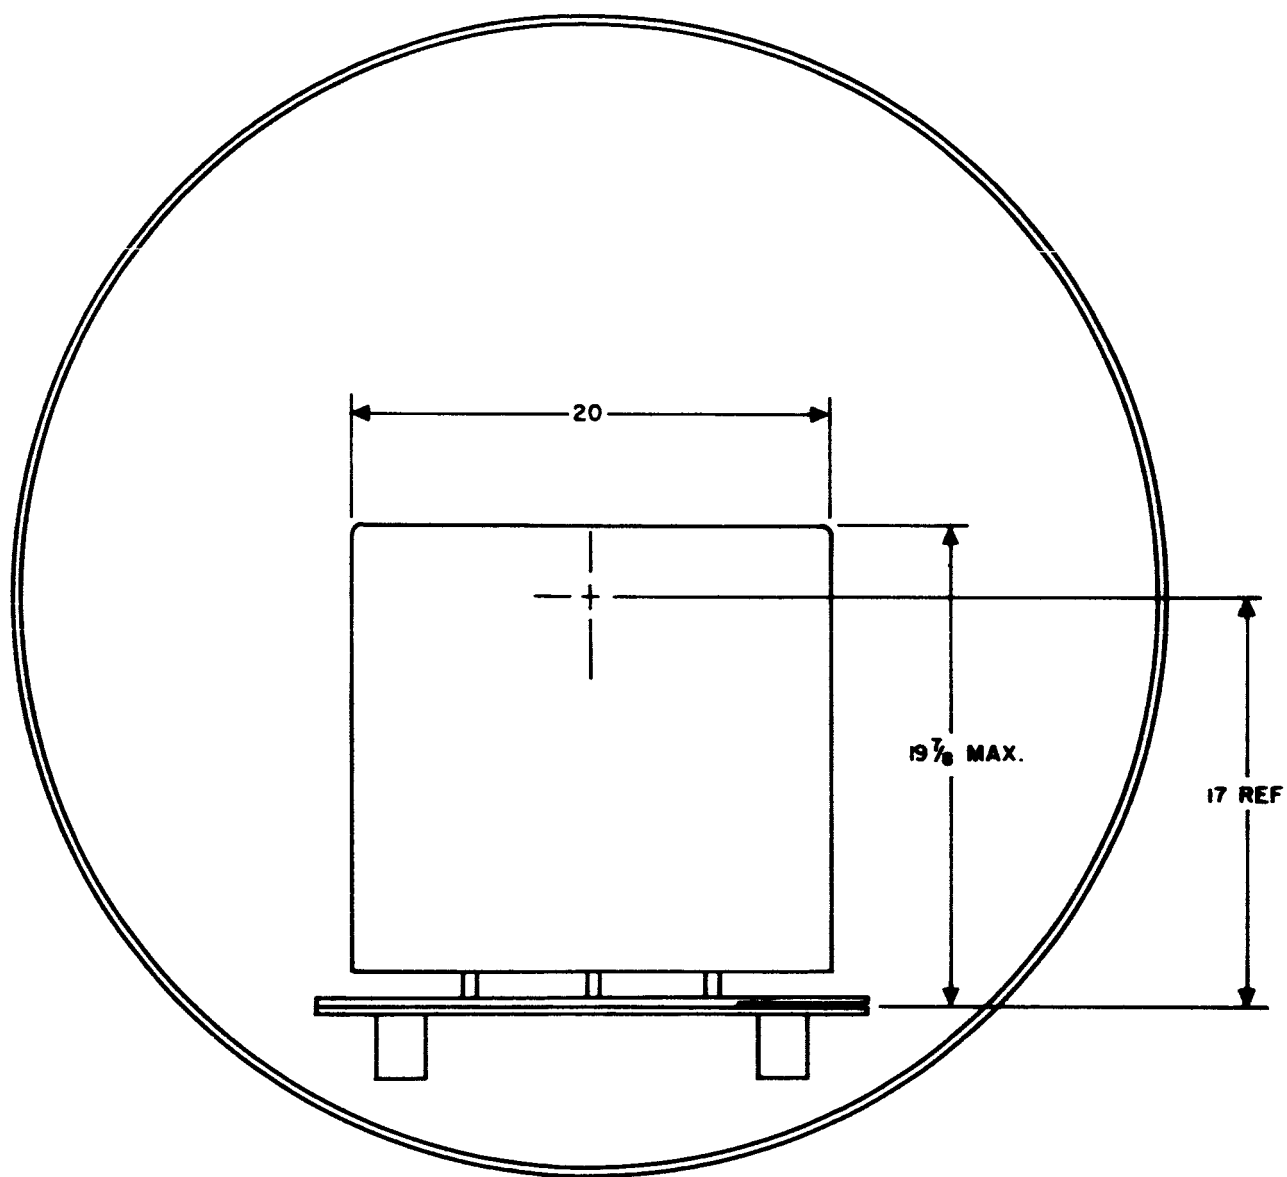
Outline drawing of thrust stand mounted in vacuum chamber.
